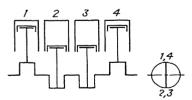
Usual crank-arm arrangement for four cylinder in-line engines.
